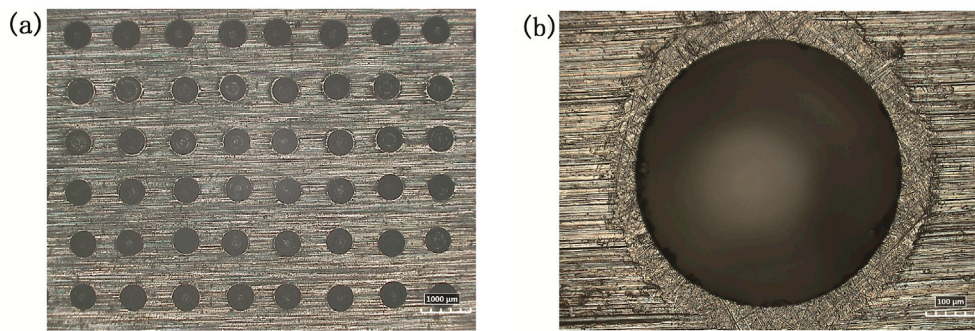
Optical micrographs of dimple textured specimen (a) drilled dimples (b) single dimple.
